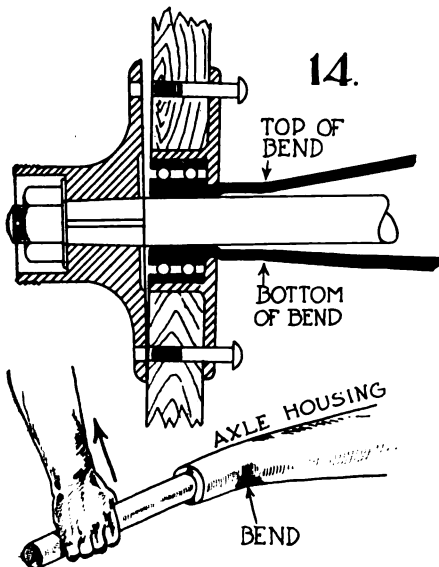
The line of bend in rear axle housings may be determined by removing the hub flange bolts, and noting the point of greatest opening between the flange and the spoke centers. The live axle must first be straightened
